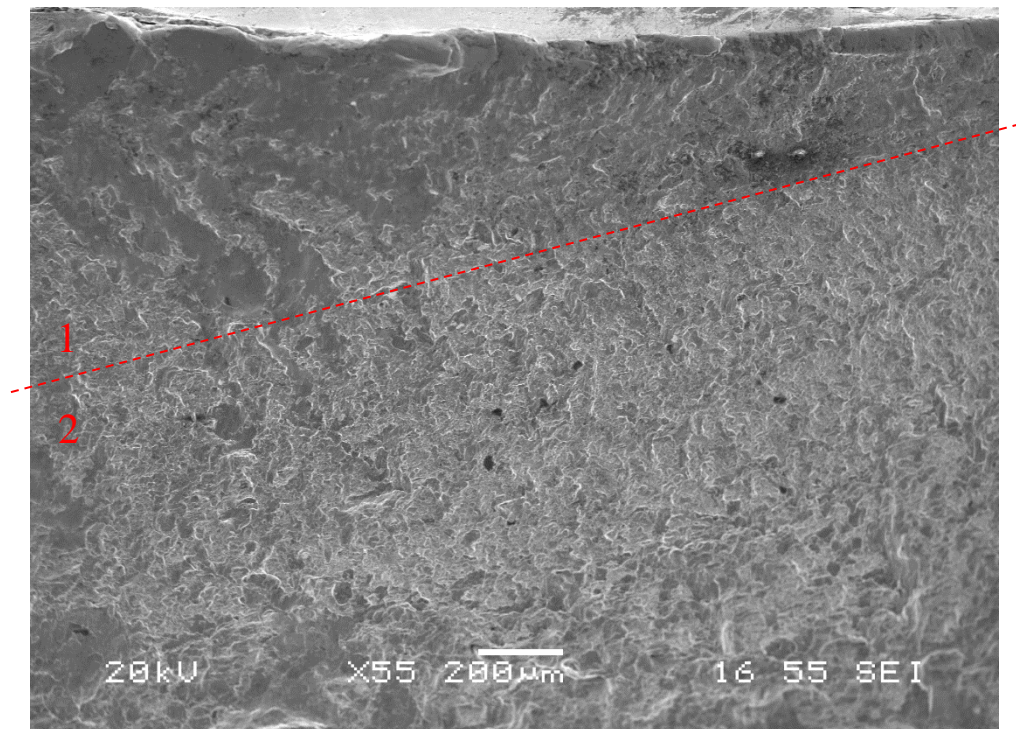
The SEM image of the fracture surface of the broken gear tooth
